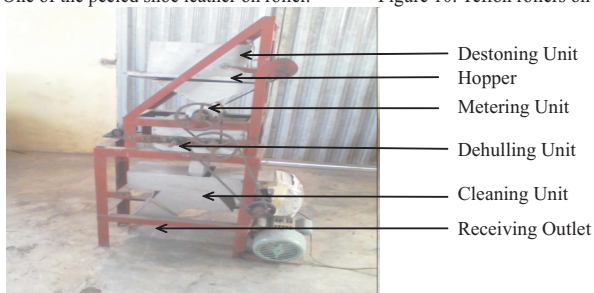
; Second prototype rice dehusking / destoning machine with Teflon rollers
